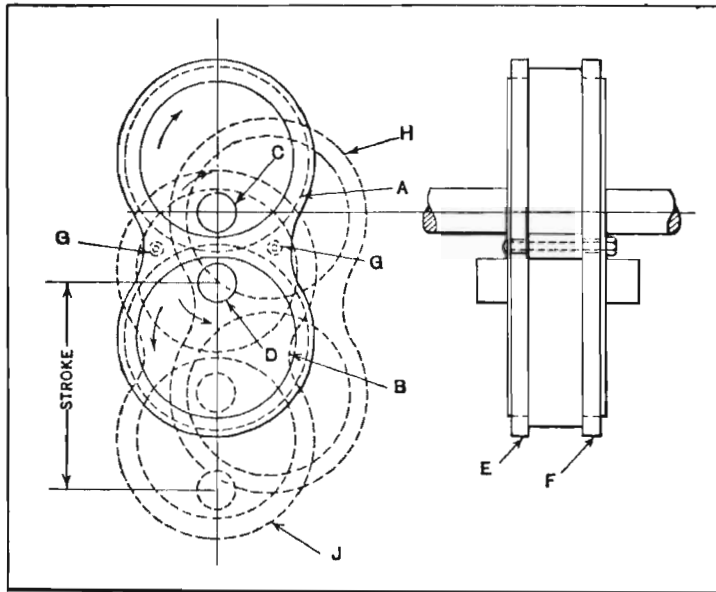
Long-stroke Mechanism so Designed that Length of Stroke Depends upon Relative Positions of Eccentric Gears
